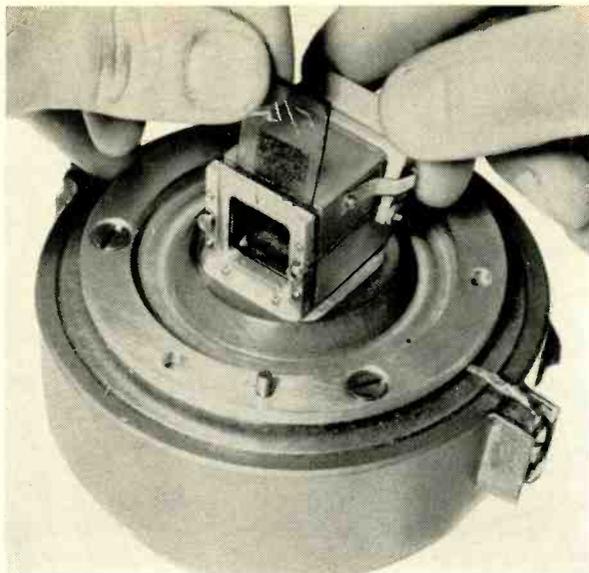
Inserting mask in a Sceptron mounted on low-impedance driver.
